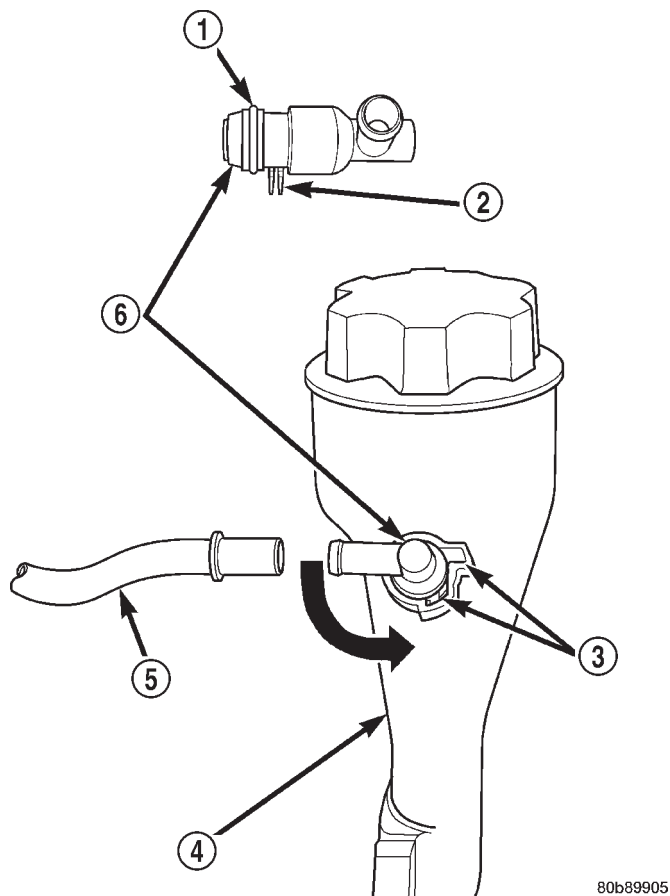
PCV Valve/Oil Filler Tube (Housing)—4.7L Engine
